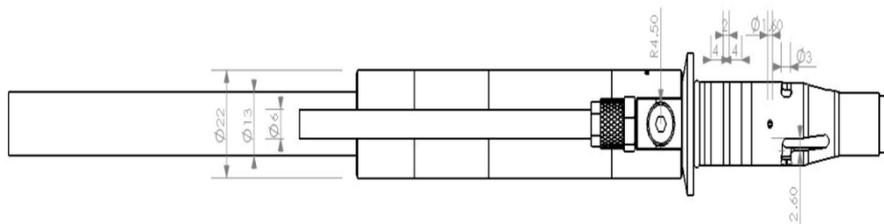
the measurement of the QBH structural layout (side-looking)
